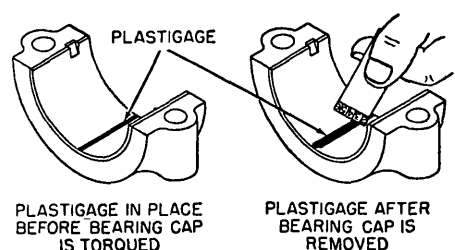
Checking bearing clearance with Plastigage. 1935-52
